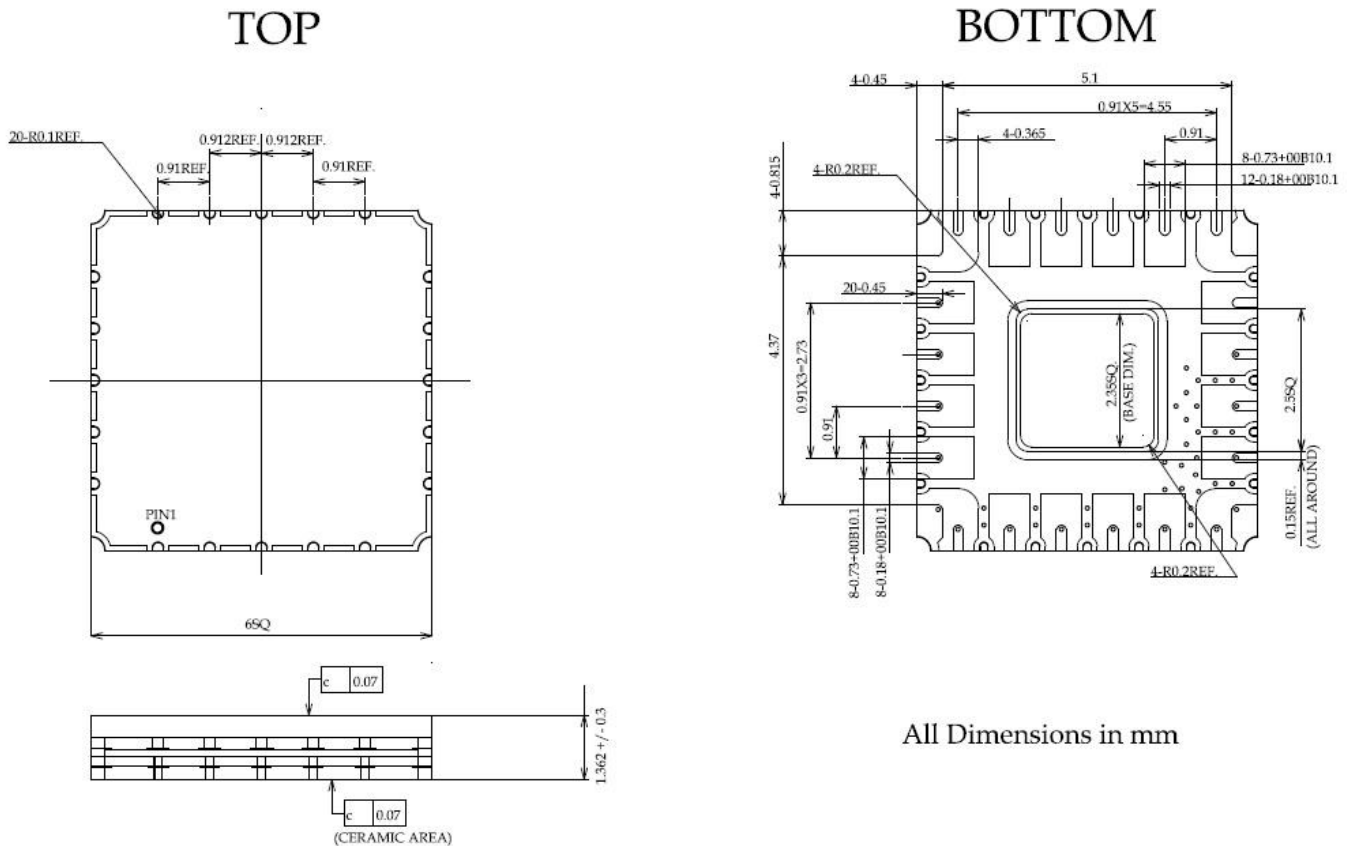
CQFN44 Package Drawing (All Dimensions in mm)
